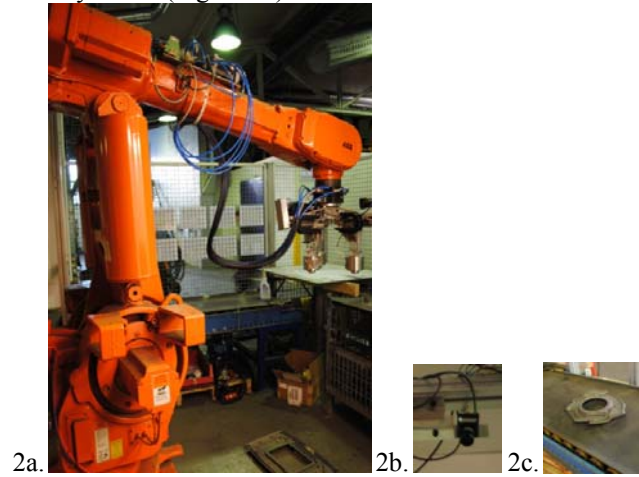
The Assembly Robot  2b. Overhead Camera 2c. Conveyor Belt.
